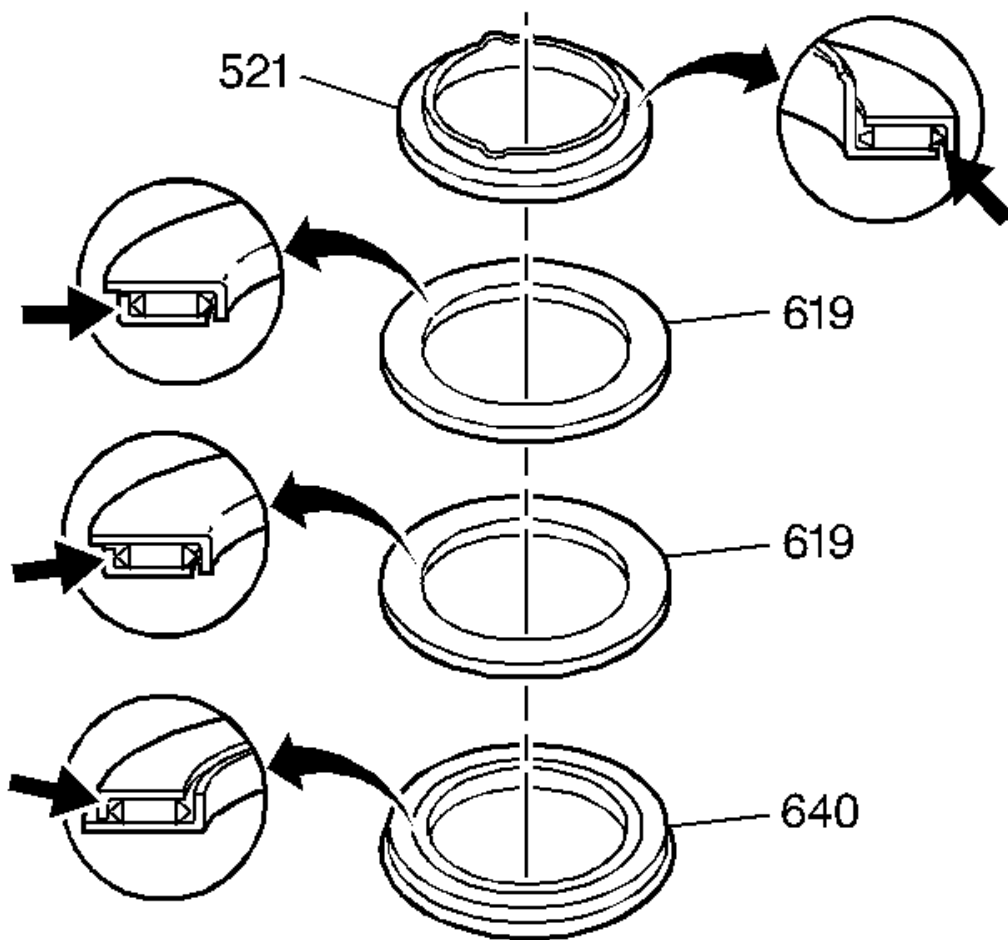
Inspecting Thrust Bearing For Damage Or Wear
